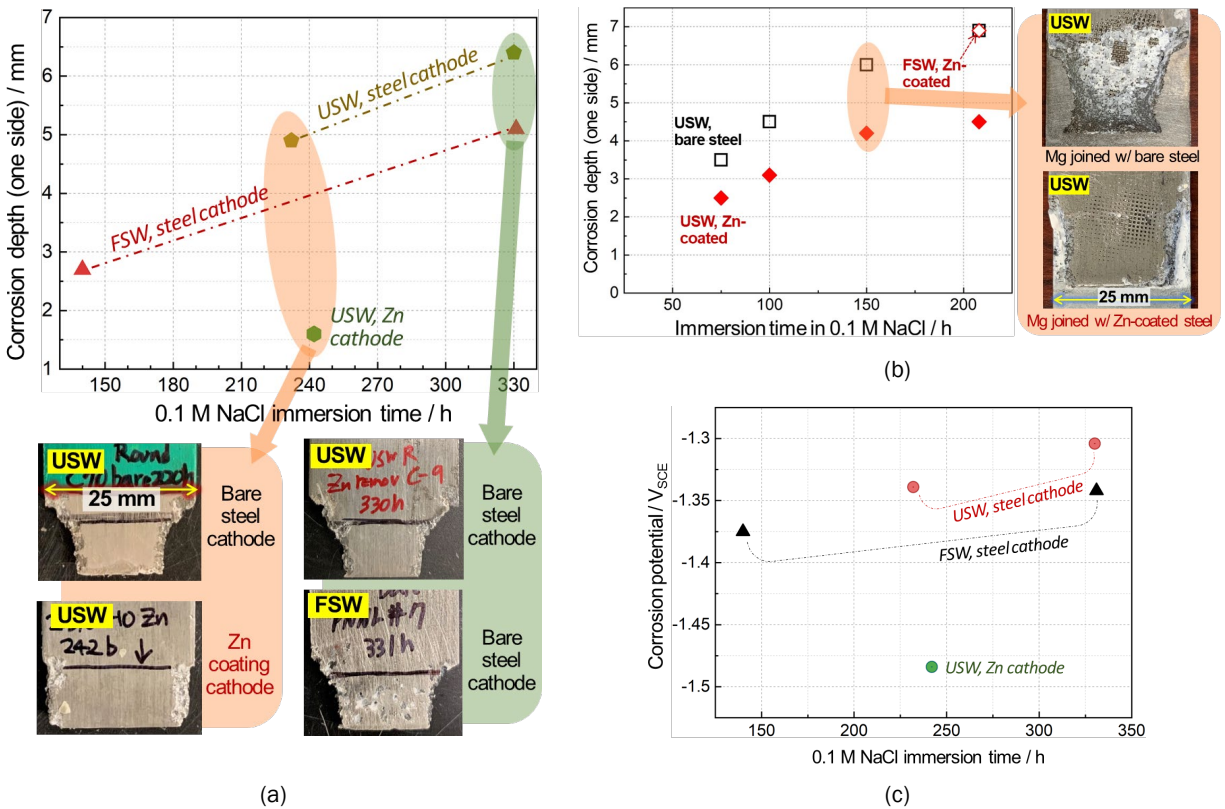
Corrosion depth measured for USW and FSW specimens with steel or Zn cathode (a) after the external corrosion exposure and (b) the weld lap/gap exposure described in Figure II.3.12.2. The four photos on the bottom in (a) and the two photos on the right in (b) are post-corrosion specimens corresponding to the data points in the shaded regions. For USW specimens, a round sonotrode ($\Phi = 10$ mm) was used for the joining process. (c) Corrosion potentials measured from the same USW and FSW joint specimens presented in (a). Source: ORNL.
